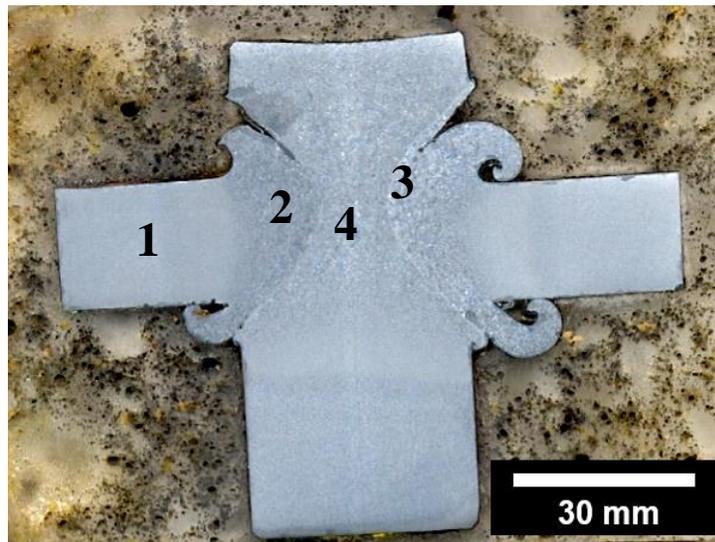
Weldment with consumable rotatory ring performed in MASF 1500.
